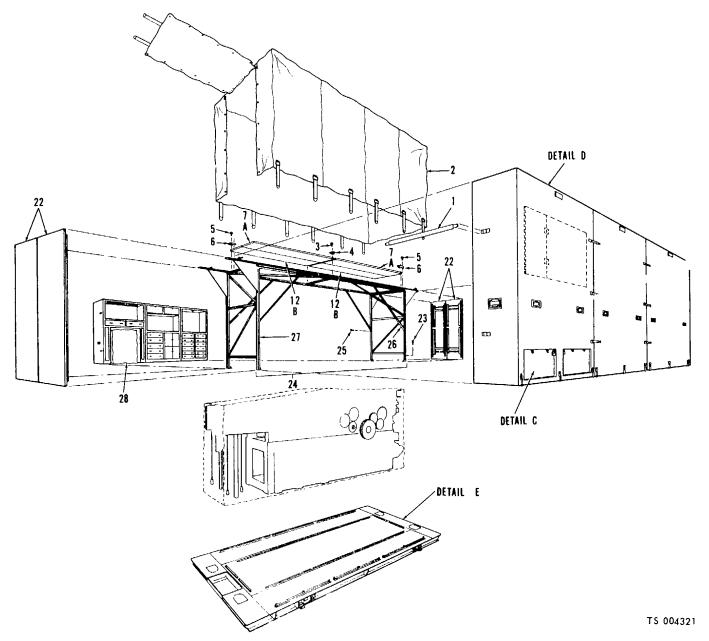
Press Package Assembly Type III (Sheet 1 of 2).
